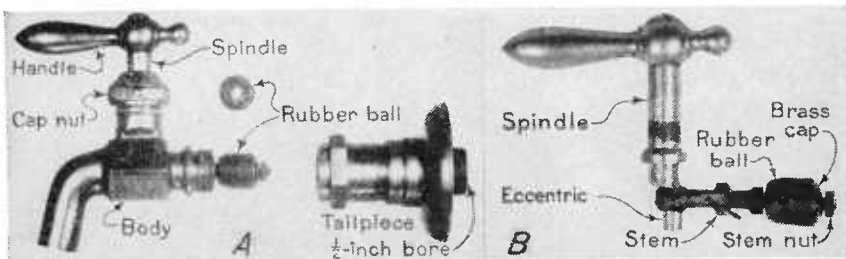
Fuller faucet: *A*, Body unscrewed from tailpiece; *B*, spindle and stem removed from body.
